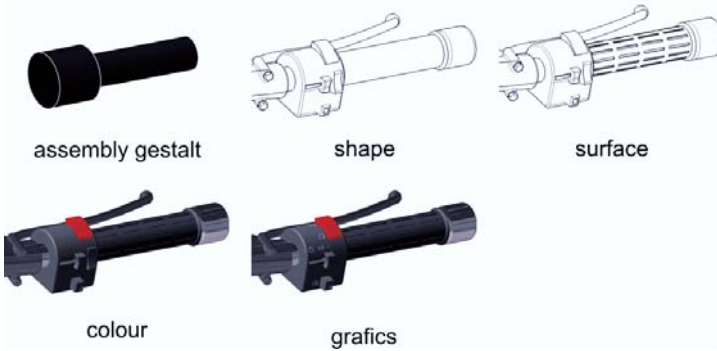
Assembly gestalt, shape, surface, colour and graphics on a motorbike hand grip
